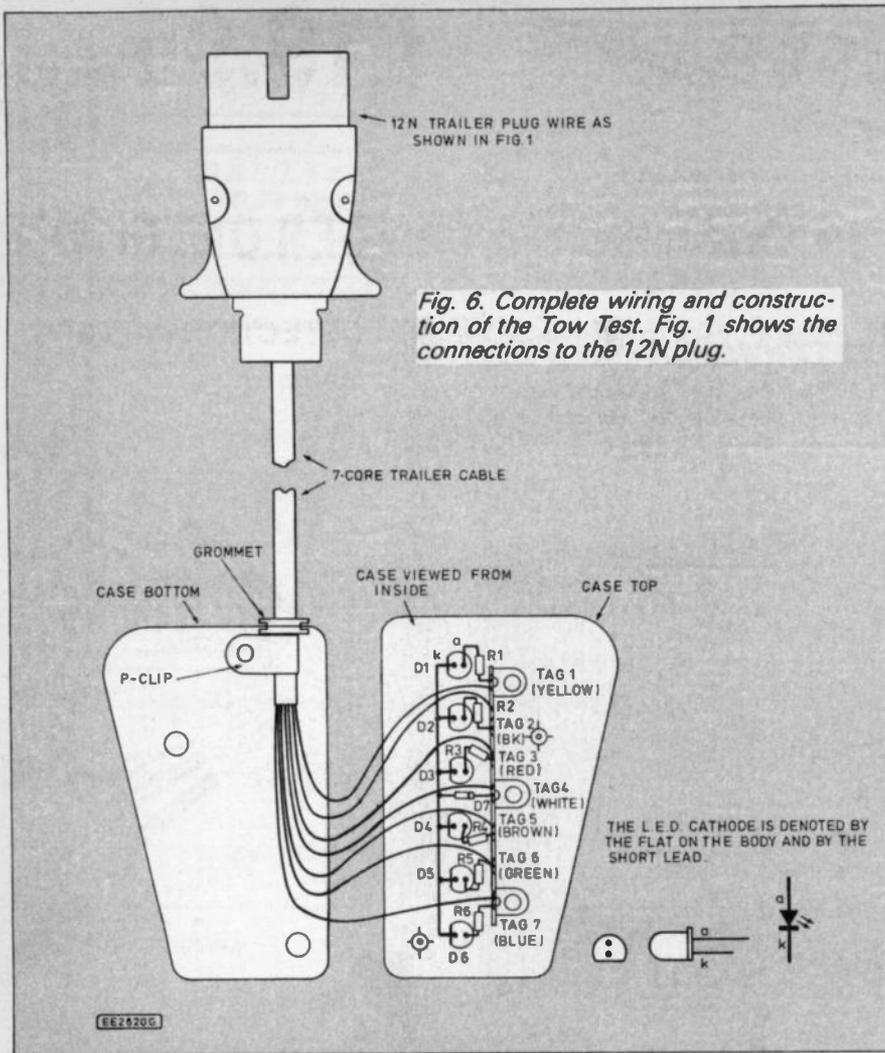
Complete wiring and construction of the Tow Test. Fig. 1 shows the connections to the 12N plug.
